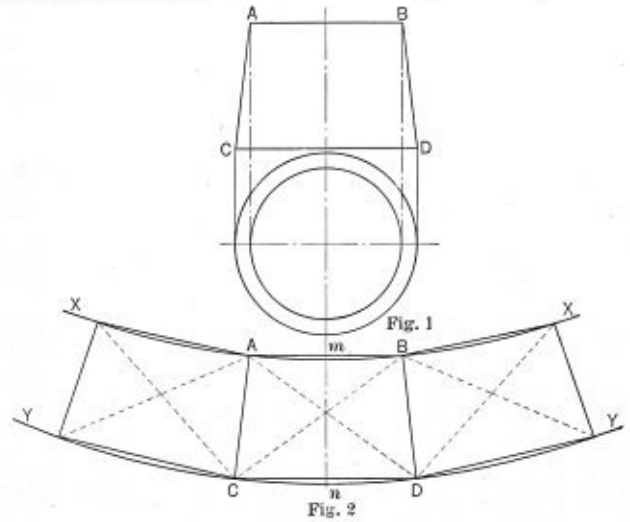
Plan and Elevation of a Frustum of a Cone.
